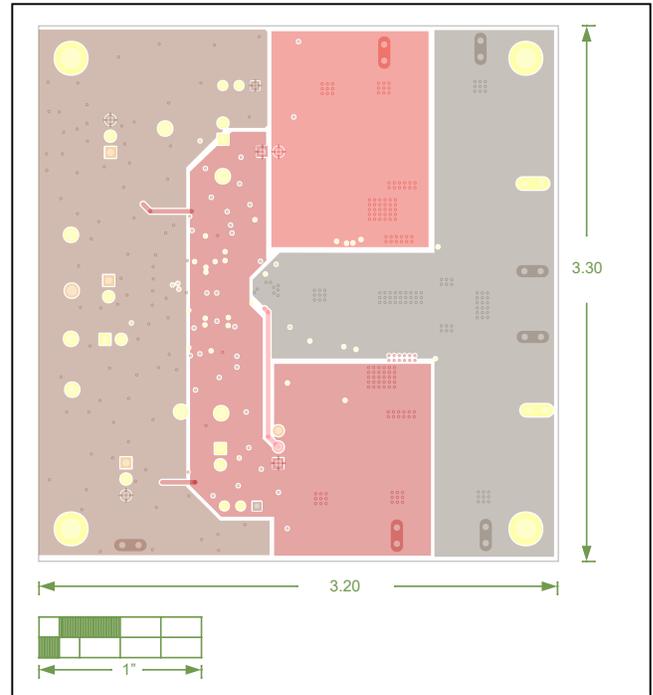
MAX20097 EV Kit PCB Layout—Bottom Layer
